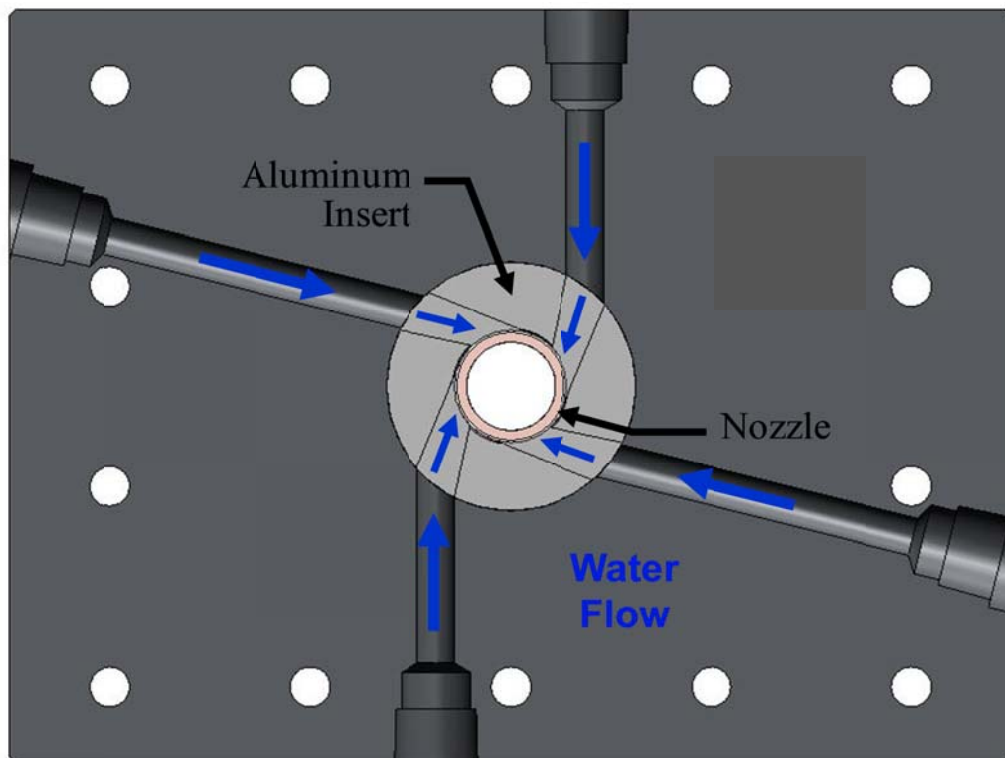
Rear cross-sectional view of water-cooled nozzle
